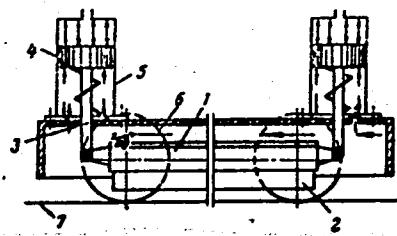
1 - chamber; 2 - gasket; 3 - rod; 4 - piston;
